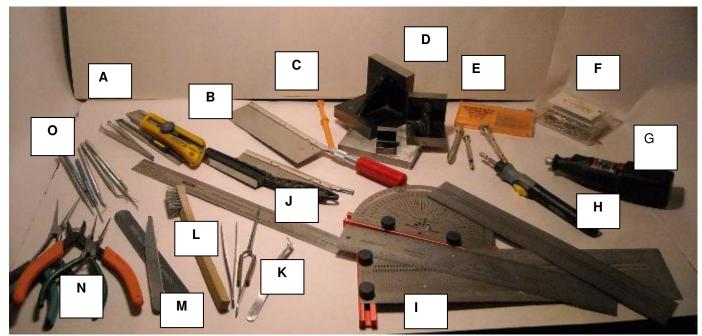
Basic Tools The Rocky Mountain Region Callboard Newsletter 12/6/2012 Page 33
